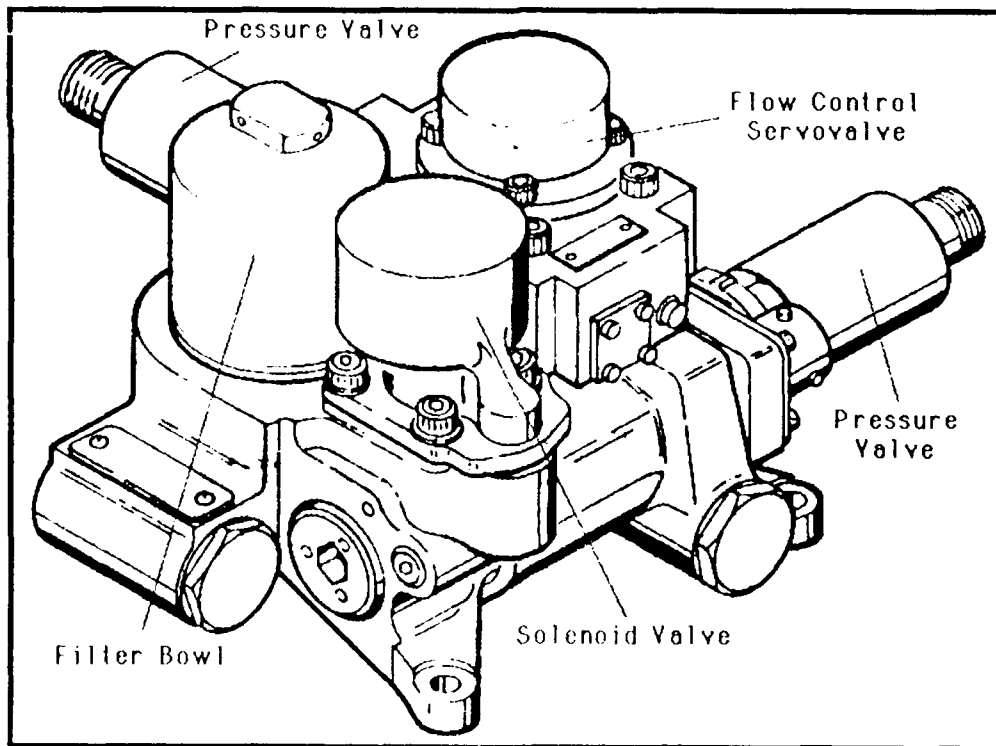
Pictorial drawing of the autobrake module, Type 1.
